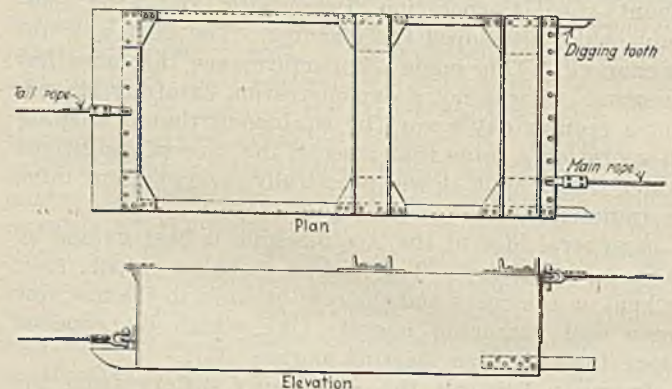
A Gathering Bucket "Built Like a Battleship"
